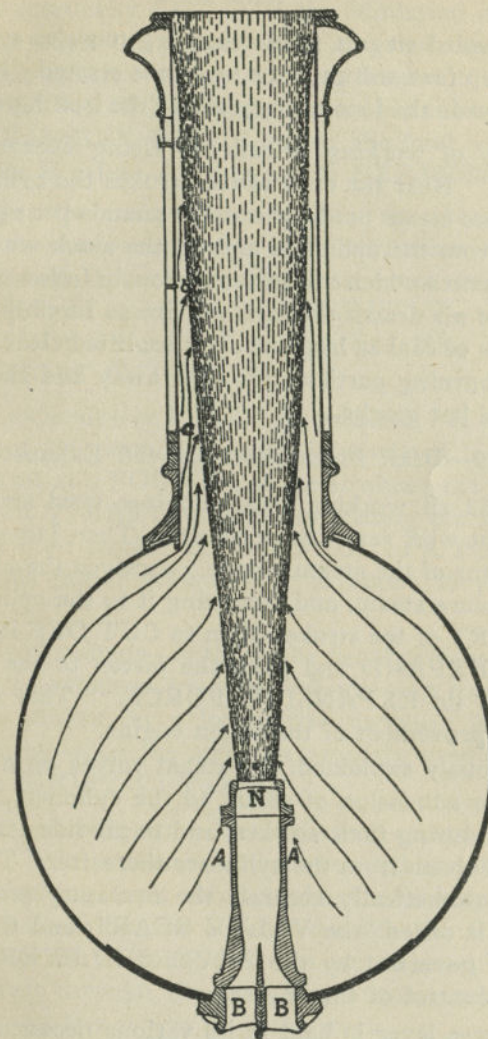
SECTIONAL VIEW OF LOCOMOTIVE SMOKE-BOX AND STACK.
